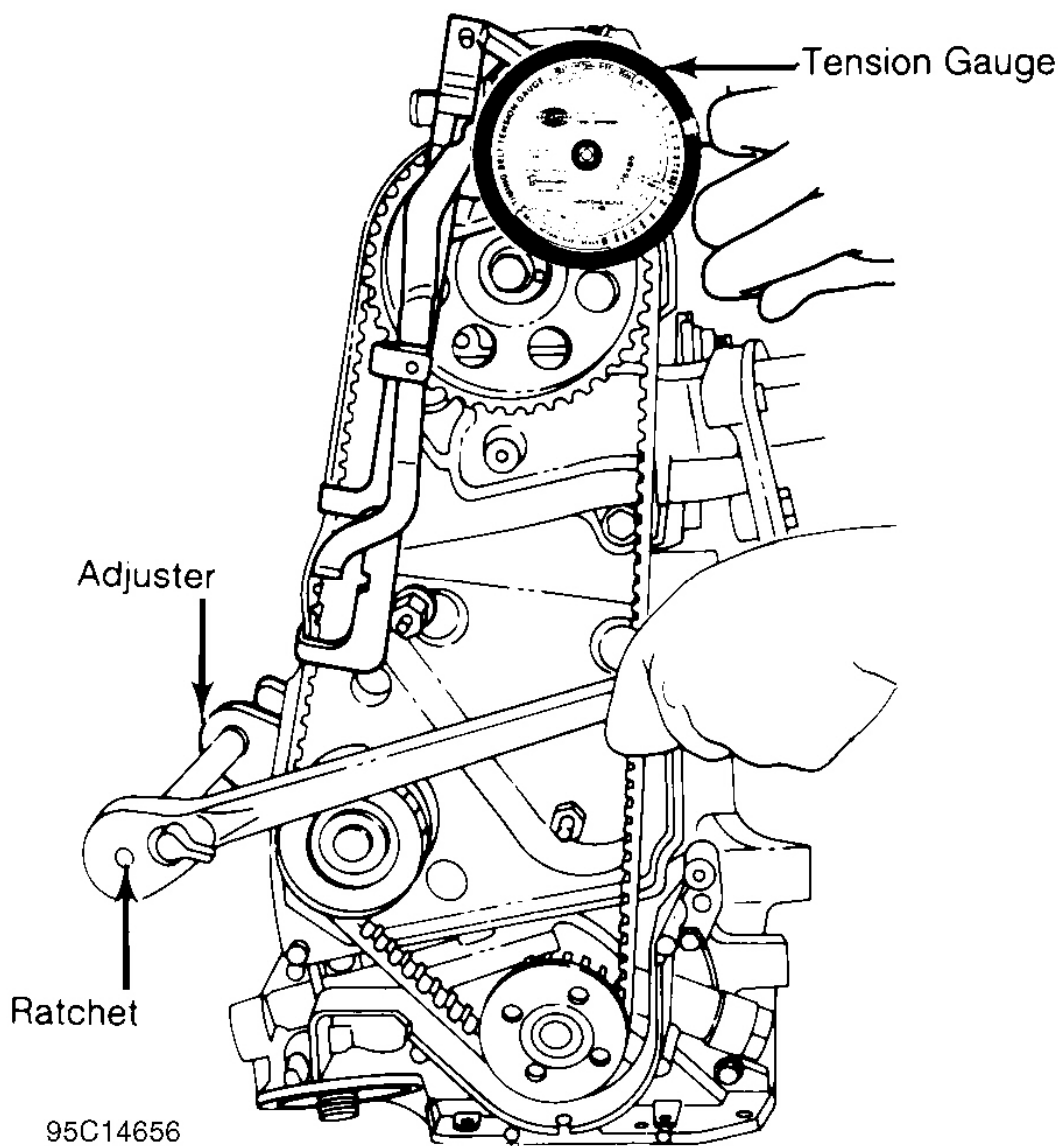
Adjusting Typical Timing Belt TensionTIMING GEARS
